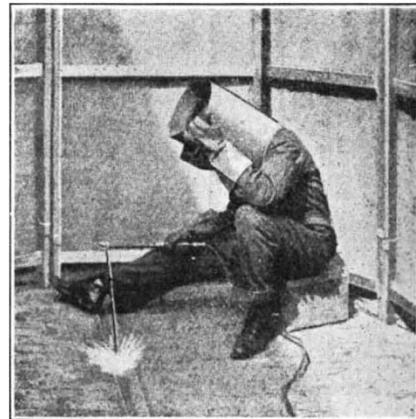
Repairing a tram-rail by arc welding, using an iron electrode.
